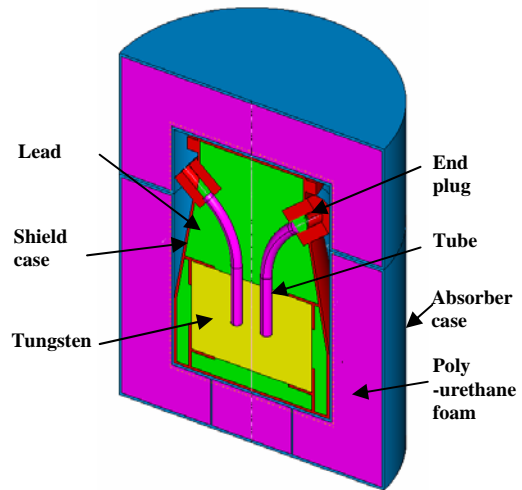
Overview of transport package for RI sealed source assembly.[4]
